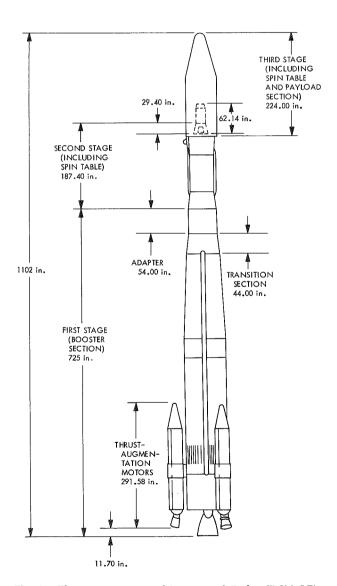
Thrust-augmented improved Delta (DSV-3E)
